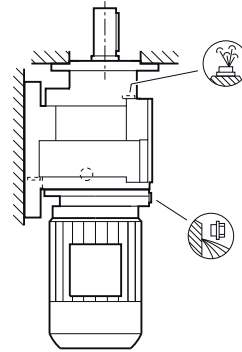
Mounting positions for helical gearbox D/Z foot-mounted design, sizes 39 - 189
